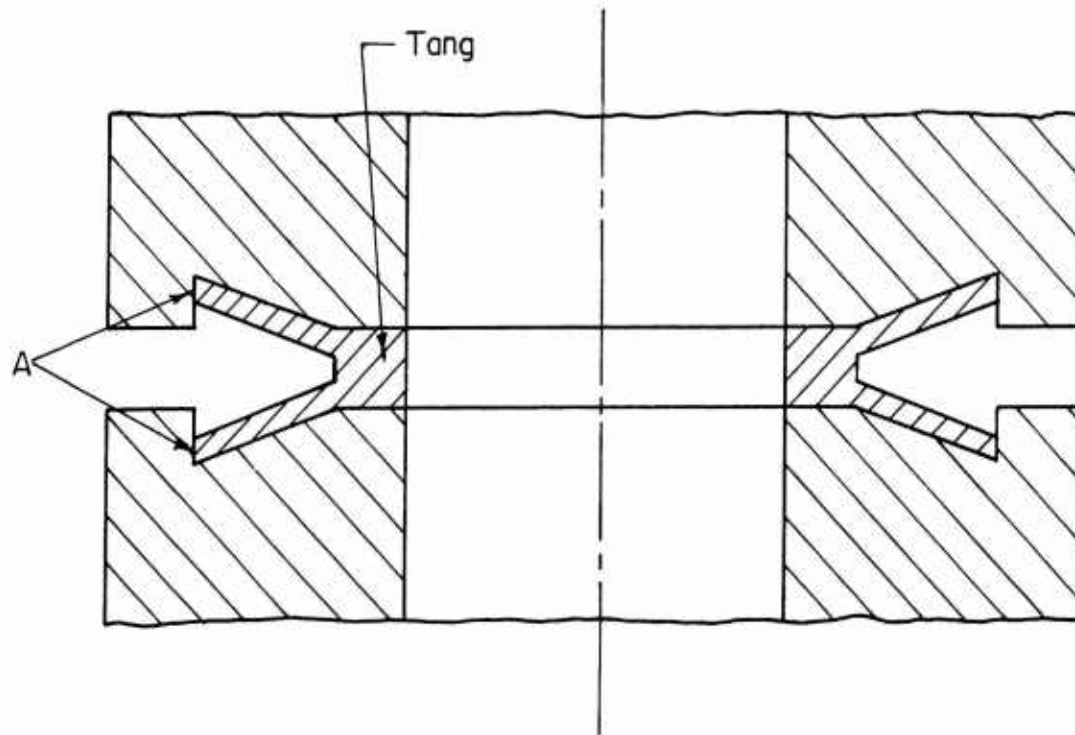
OUTSIDE BOBBIN SEAL AND MATING STUB ENDS
